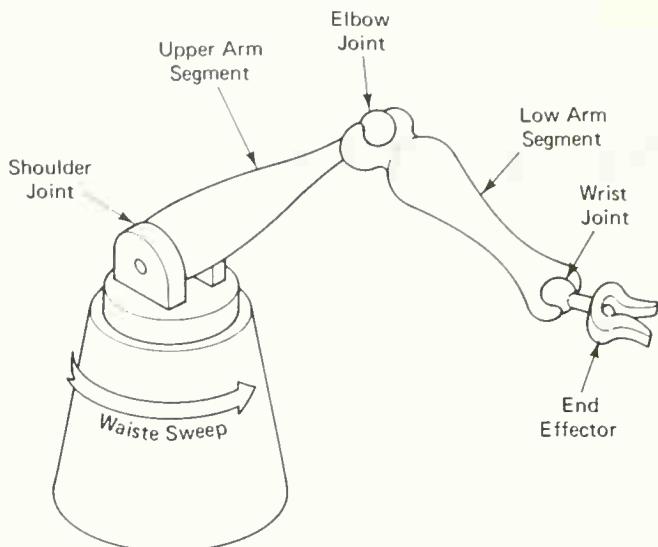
Joint and segment arrangement of a jointed-arm robot.
